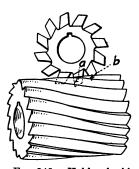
Hold a double angle cutter in the groove of a spiral milling cutter with the cutting edges a vertical and touching the sides of the groove, then observe the amount of clearance (space) between the cutting edges b and the groove.
